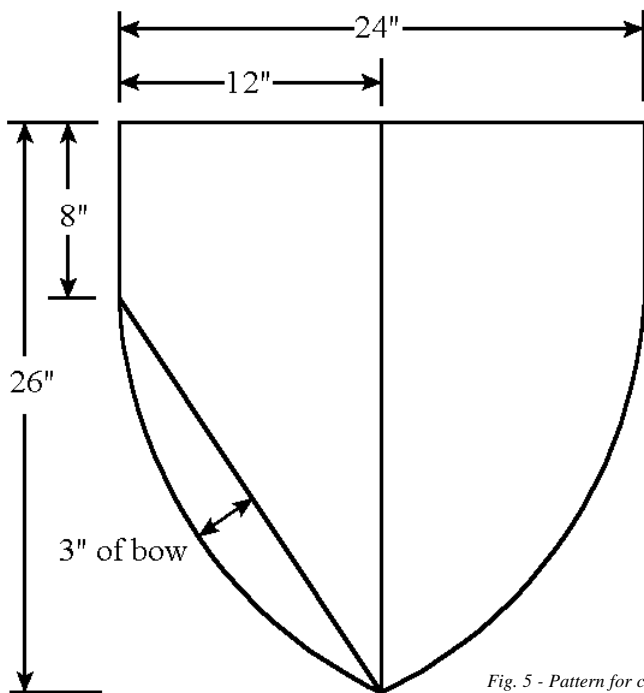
Pattern for cutting a Heater-shaped shield blank.
